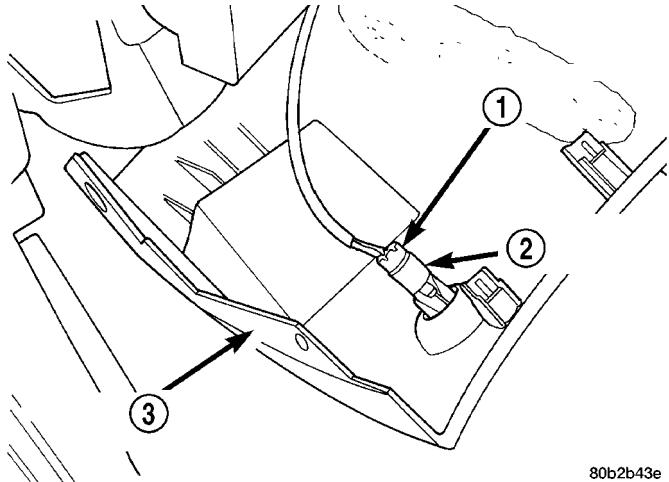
Lower Instrument Panel Cover Mounting Screws
